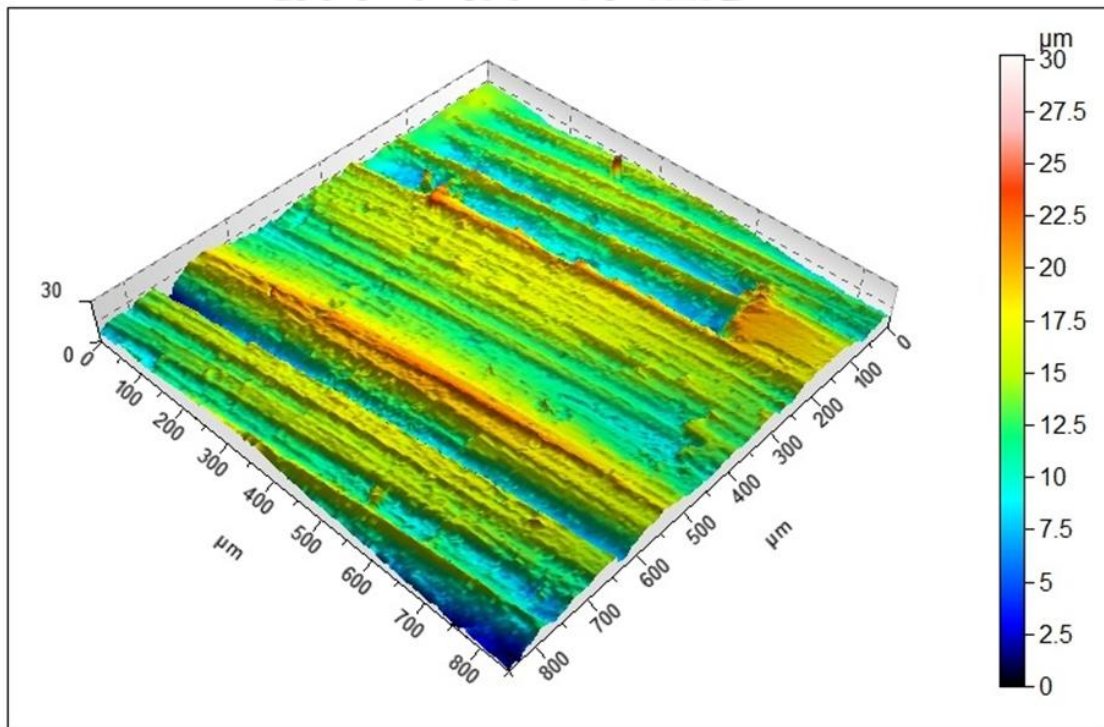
Three dimensional topography of AISI 1050 steel at 0.04 mm/rev feed (75 m/min cutting speed, 1 mm depth of cut 2 mm tool separation distance)
